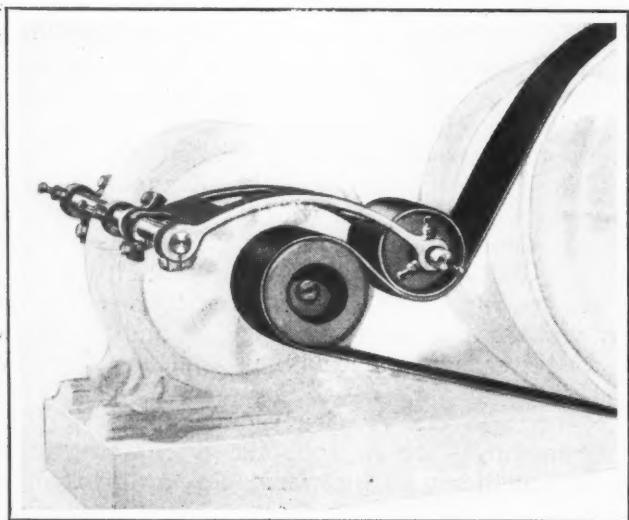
Method of Applying "Beltslacker" to Motor Housing
